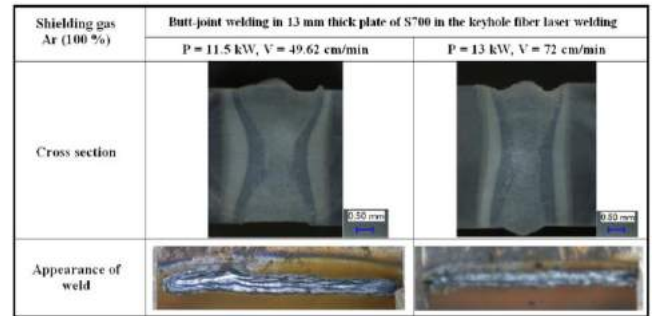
Effect of laser power and welding speed on the weld bead formation
